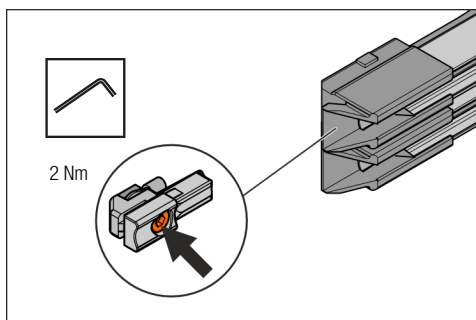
Tighten the power feed terminal and check that the power feed terminal and end cap are firmly seated.
